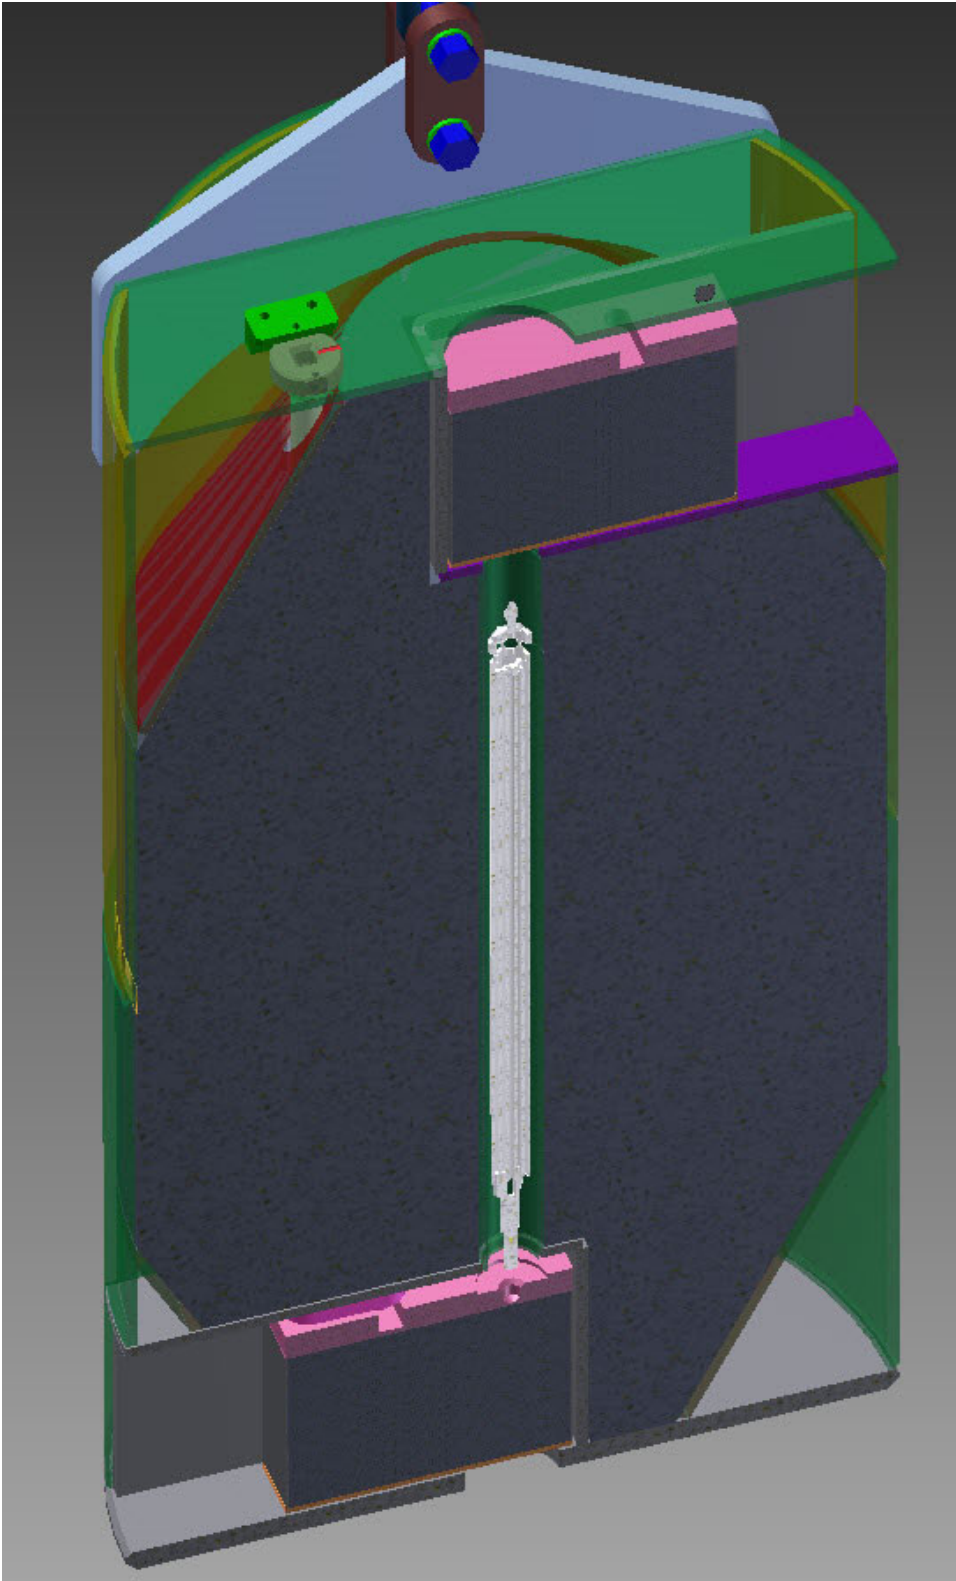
Section view through the fuel transfer cask, showing the upper and the lower gates closed with a fuel assembly.
